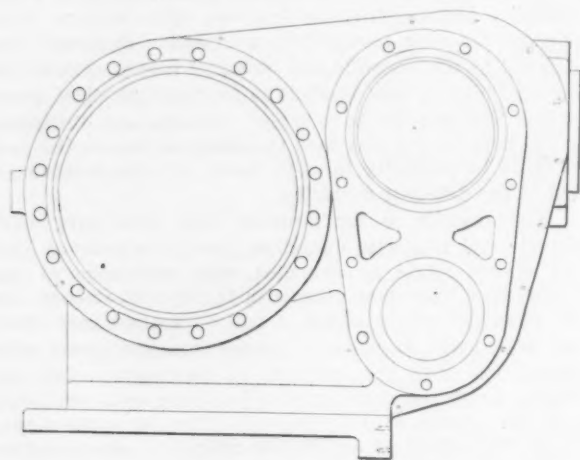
An Example of a Locomotive Cylinder Casting That Can Be Bored at One Setting on the New Machine.
